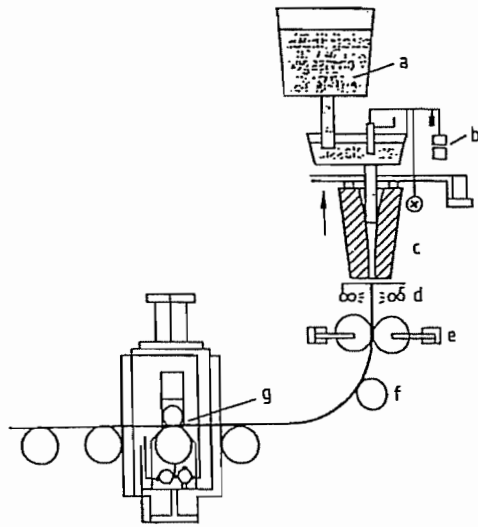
Casting–press–rolling process: a) Ladle; b) Tundish; c) Mold; d) Descaling; e) Press rollers; f) Bending roller; g) Straightening unit.
